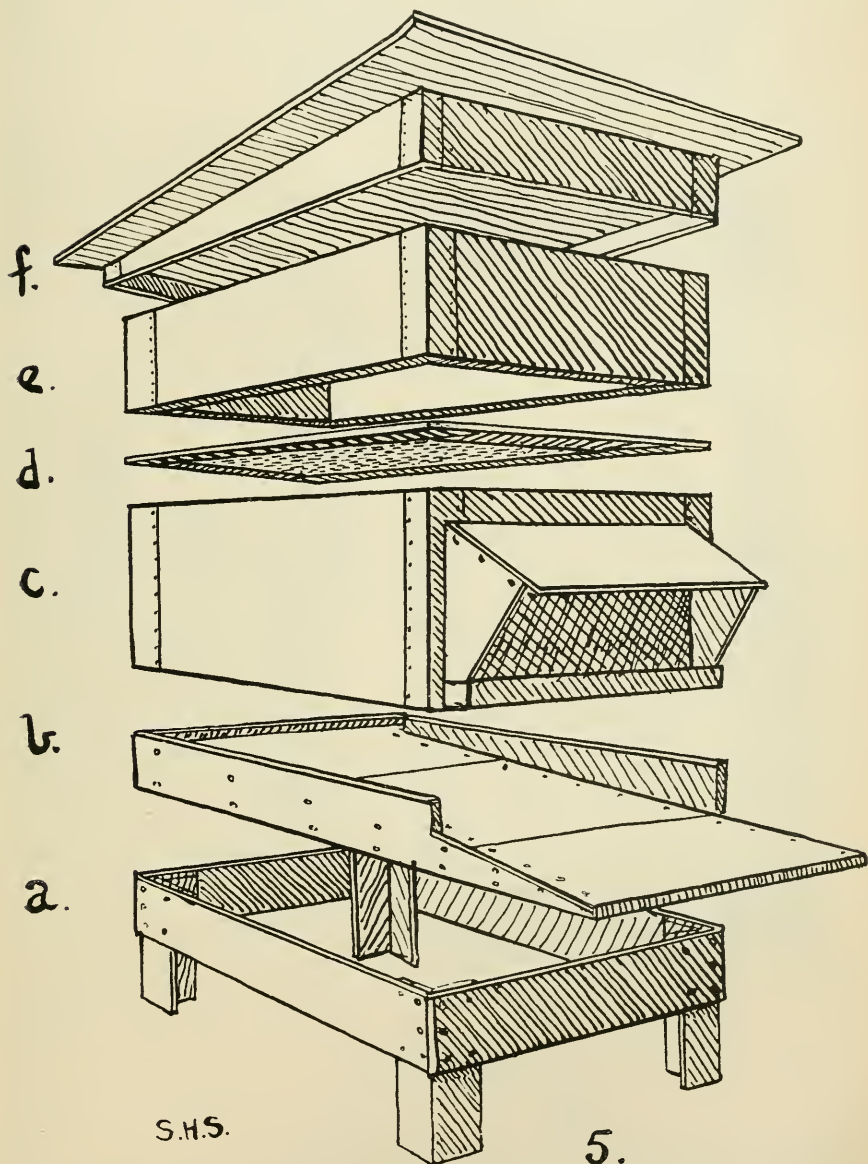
Complete Hive, showing component parts. *a.* Stand. *b.* Bottom Board. *c.* Brood Chamber. *d.* Queen Excluder. *e.* Super. *f.* Cover.
